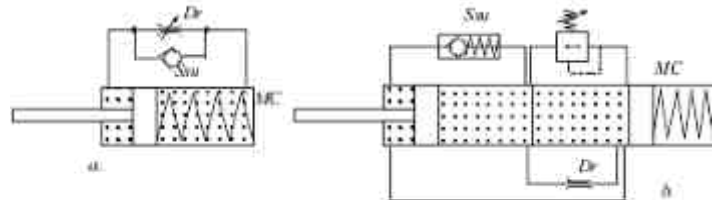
a) Hydraulic damper; b) Industrial shock damper
